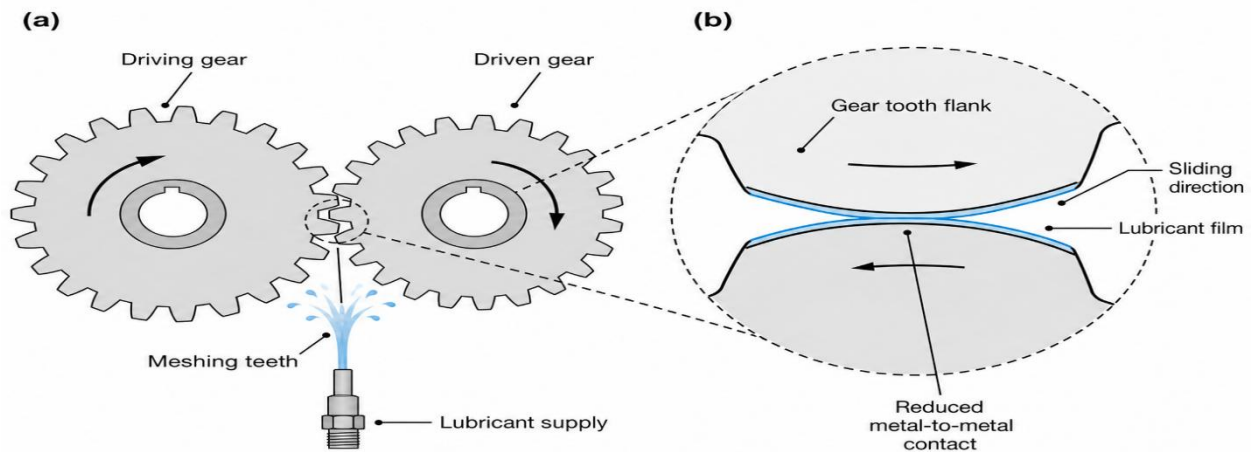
Schematic illustration of the lubrication mechanism in a spur gear pair: (a) lubricant supply to the meshing region of the driving and driven gears, and (b) magnified view of the gear tooth contact zone showing the lubricant film separating the tooth flanks and reducing direct metal-to-metal contact.
